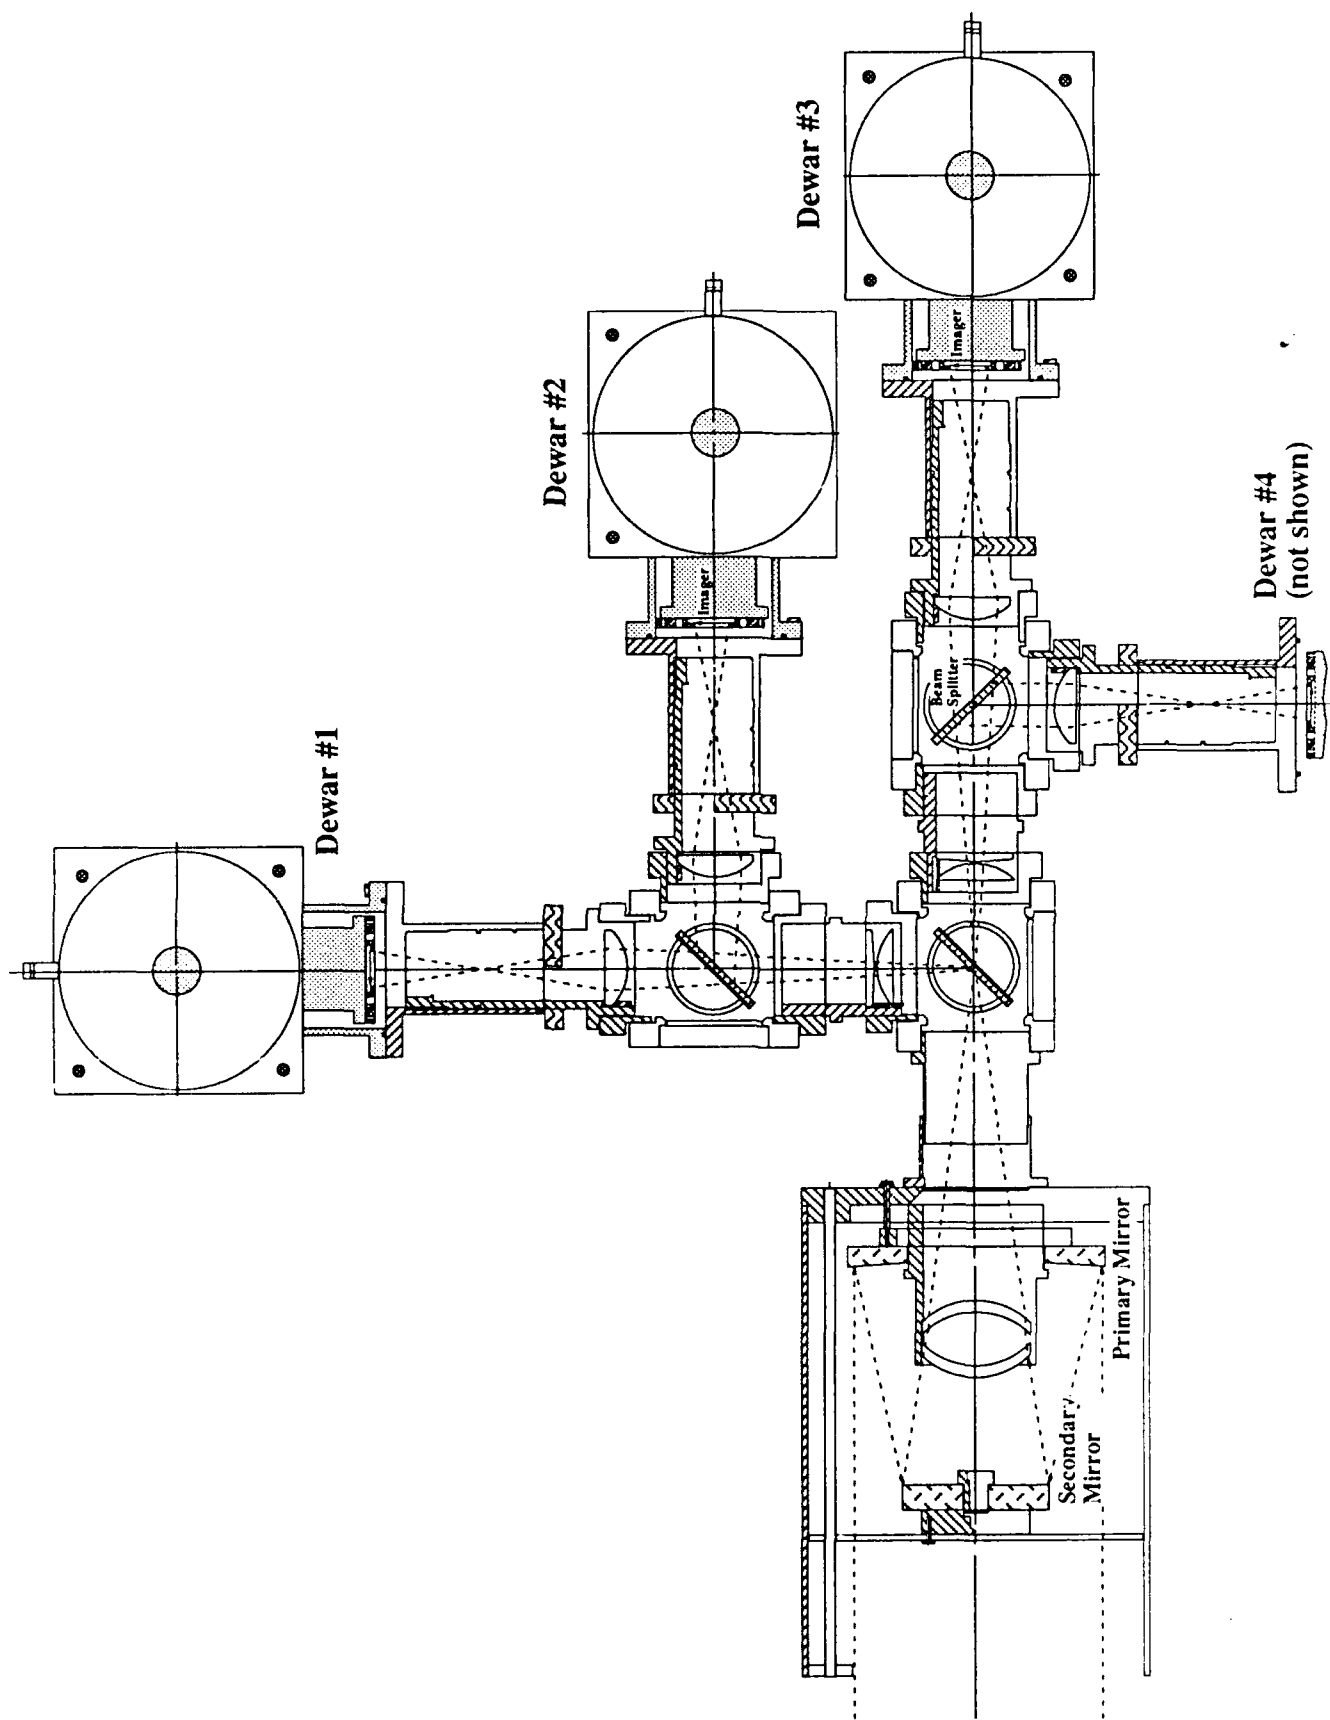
Assembly Drawing of Four-Color Imaging System with Reflective Optics Arrangement
